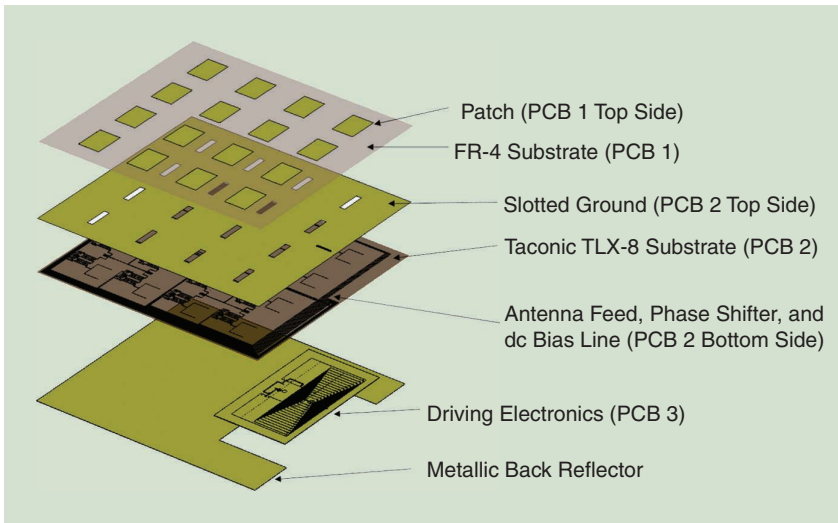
The overall layout of the L-band 4×4 phased array. PCB: printed circuit board.
